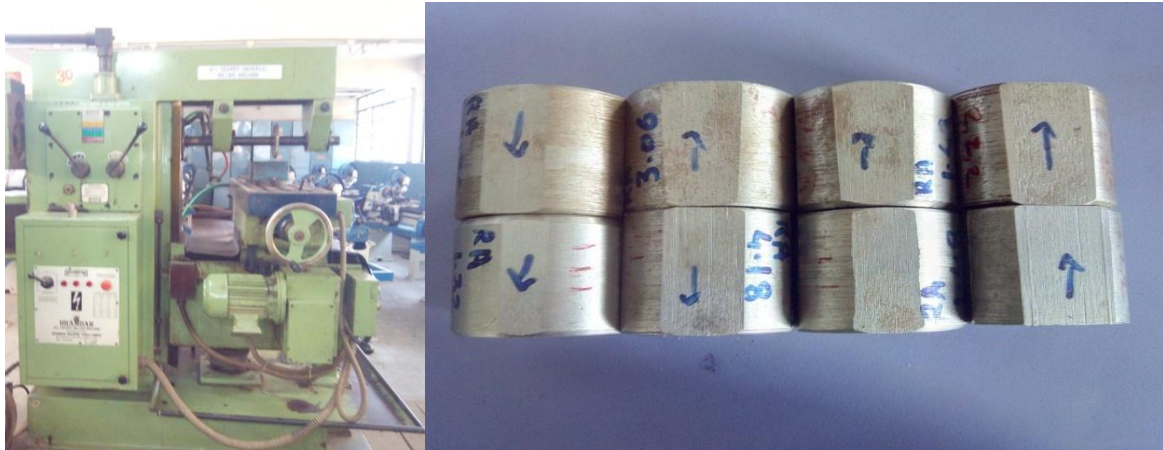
Photo of Actual Milling Carried out at DKTE Workshop and Finished Milled Components
